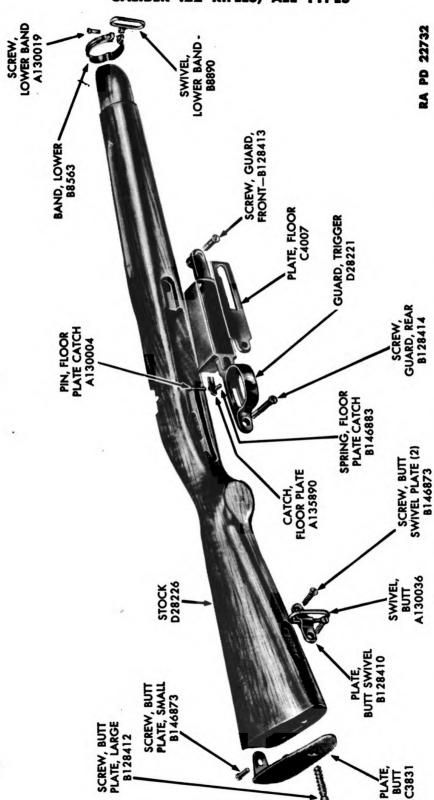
Stock Group of U.S. Rifle, Cal. .22, M2 - Exploded View
